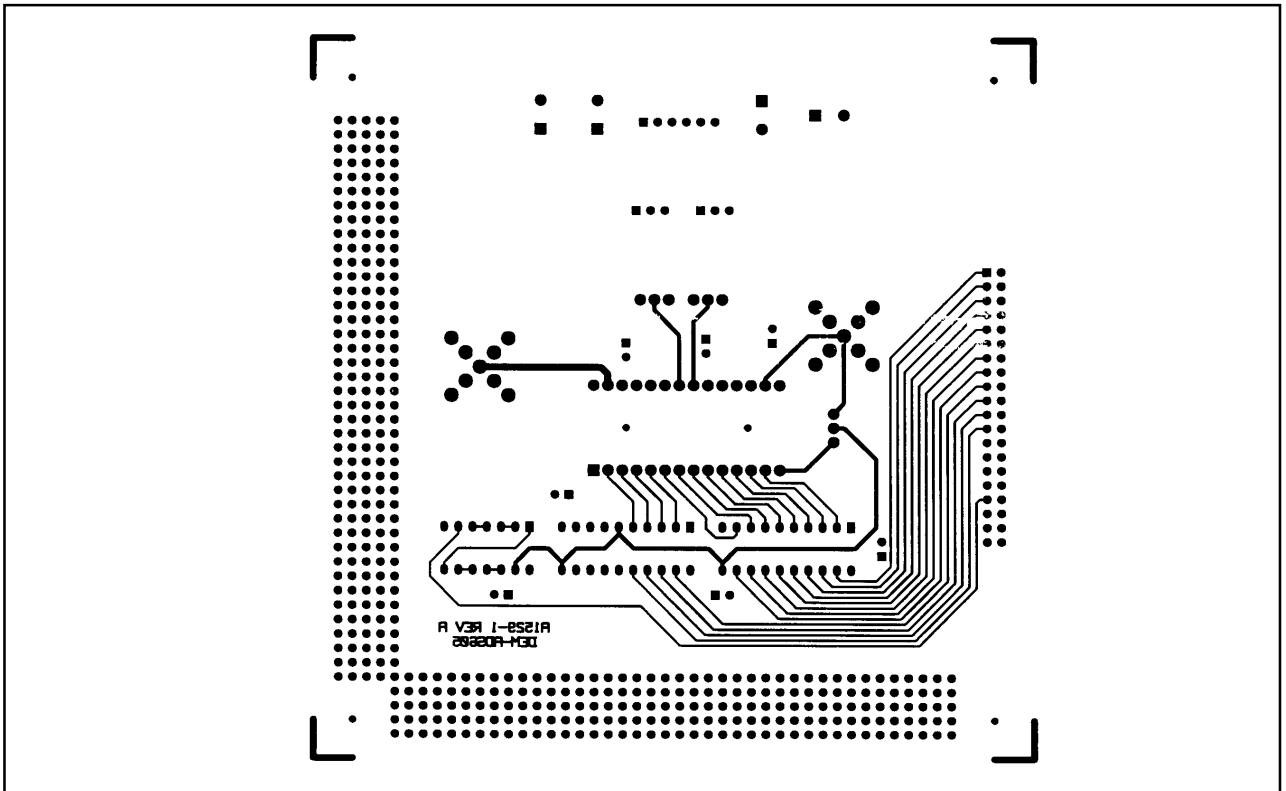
DEM-ADS605 Bottom PCB Layer. Interconnect, Top View.
